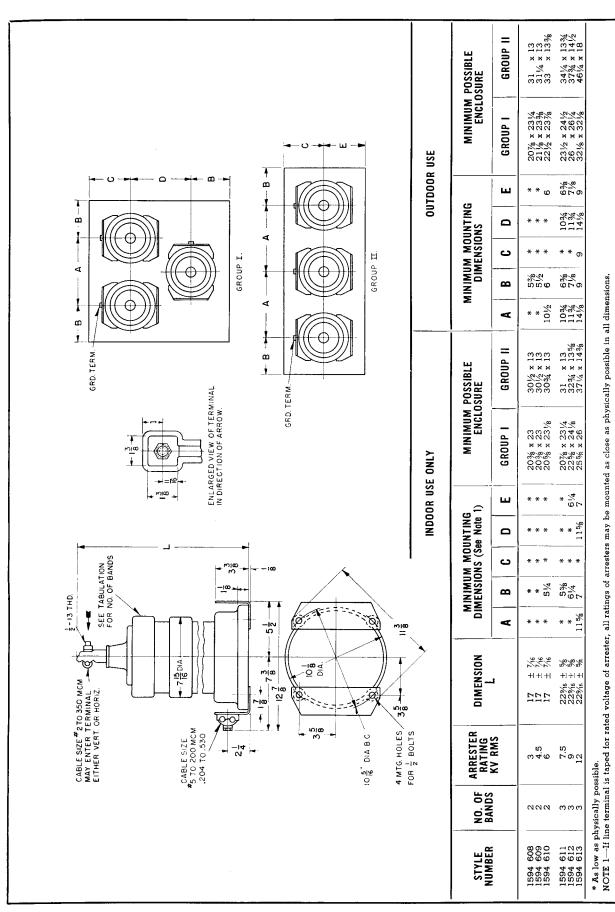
Outline Dimensions and Clearances of Type SV Autovalve Lightning Arresters for Machine Protection
